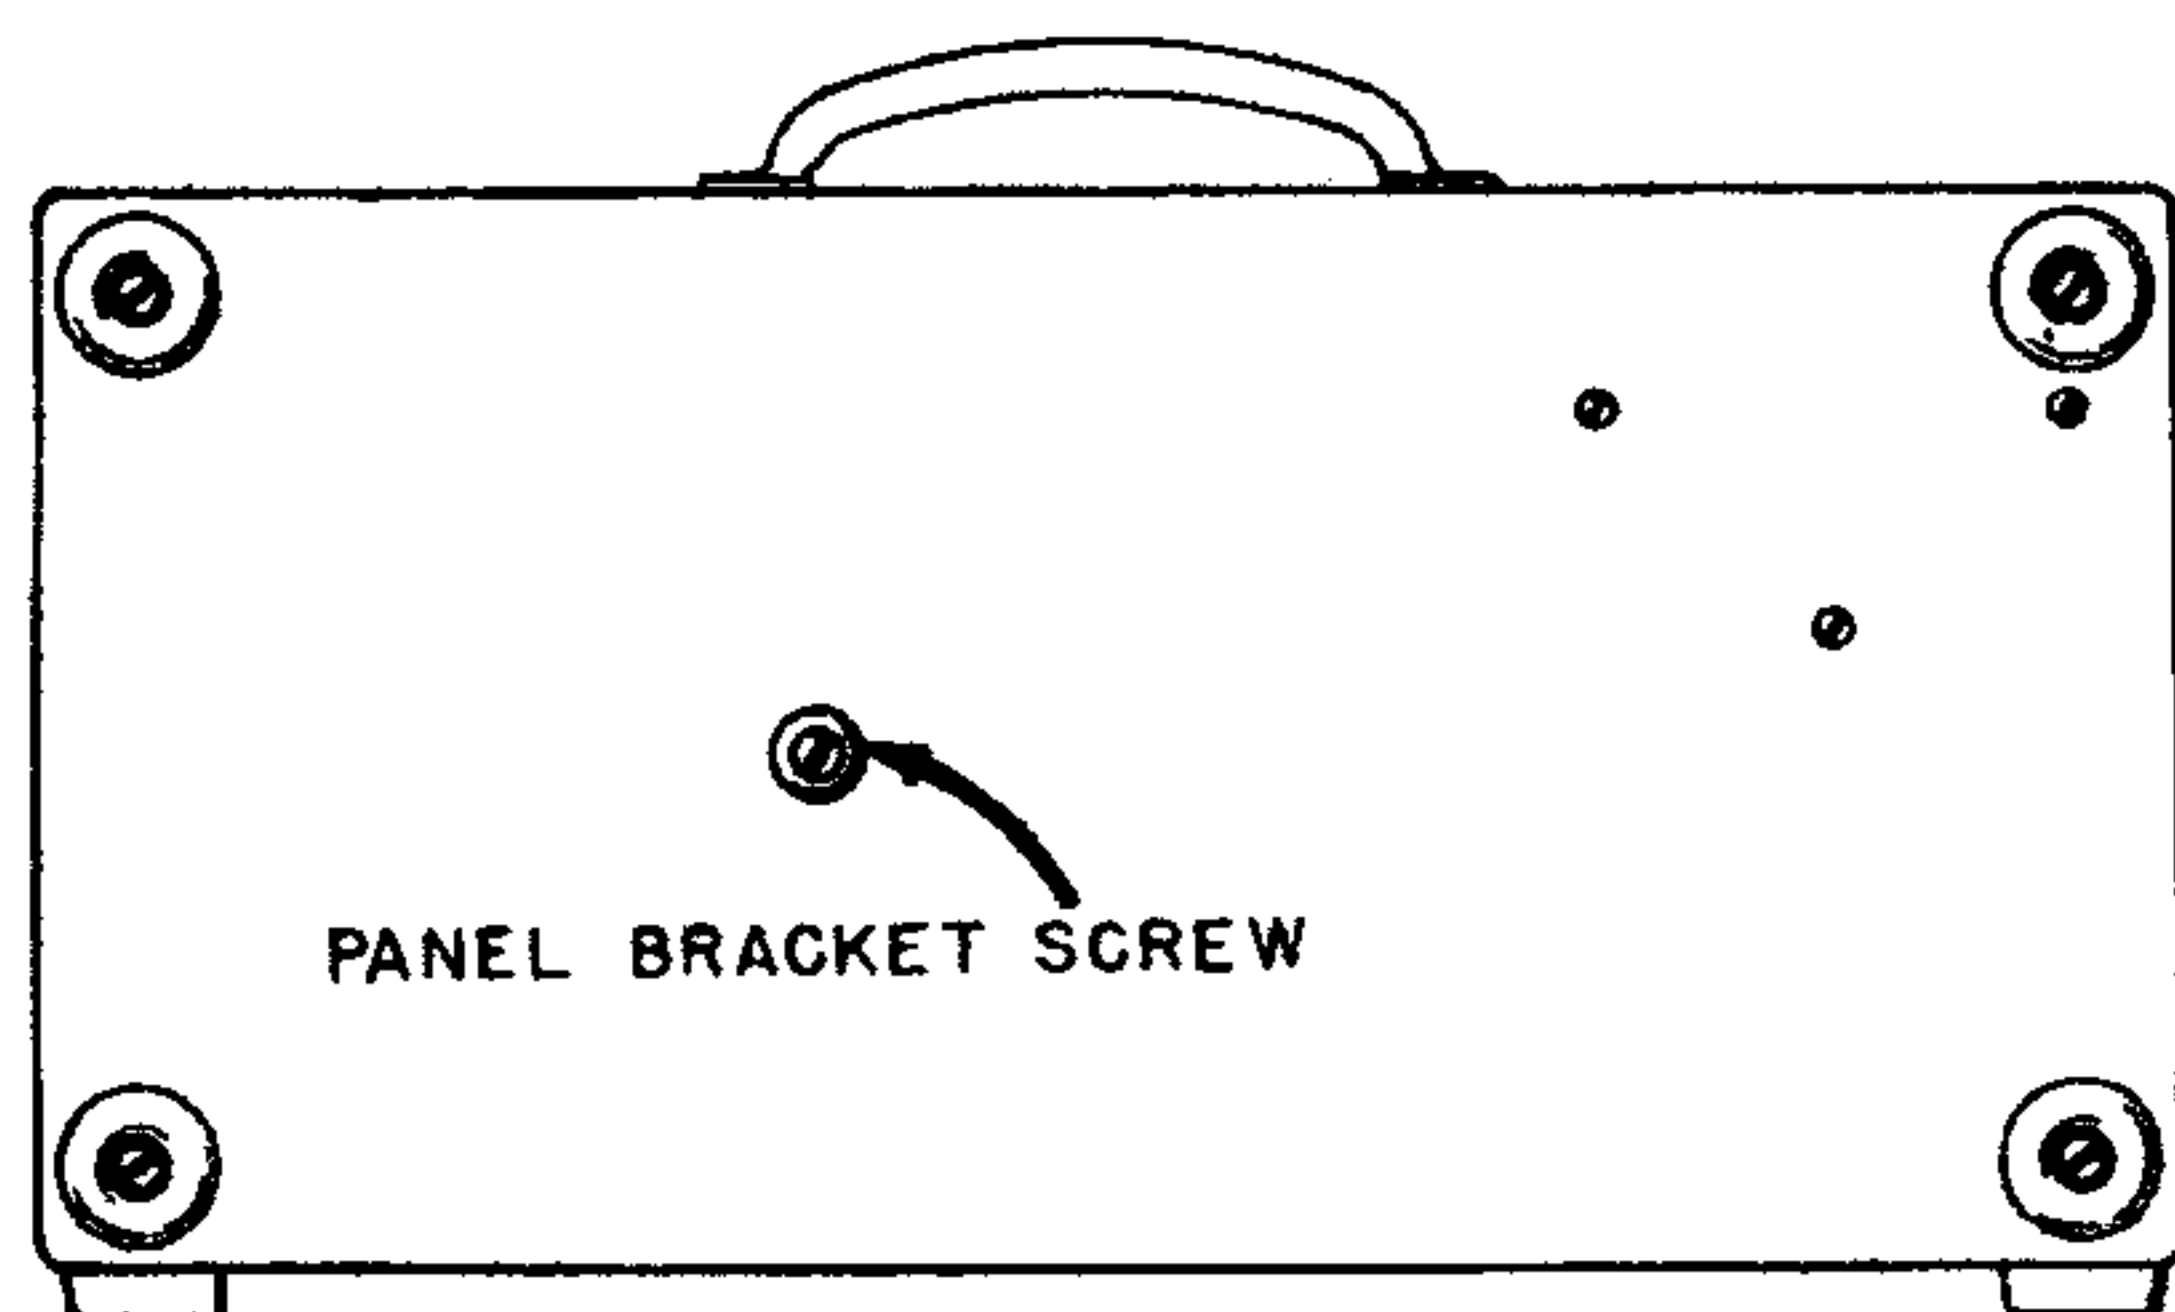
Bottom View of Case Showing Location of Panel Bracket Screw.
